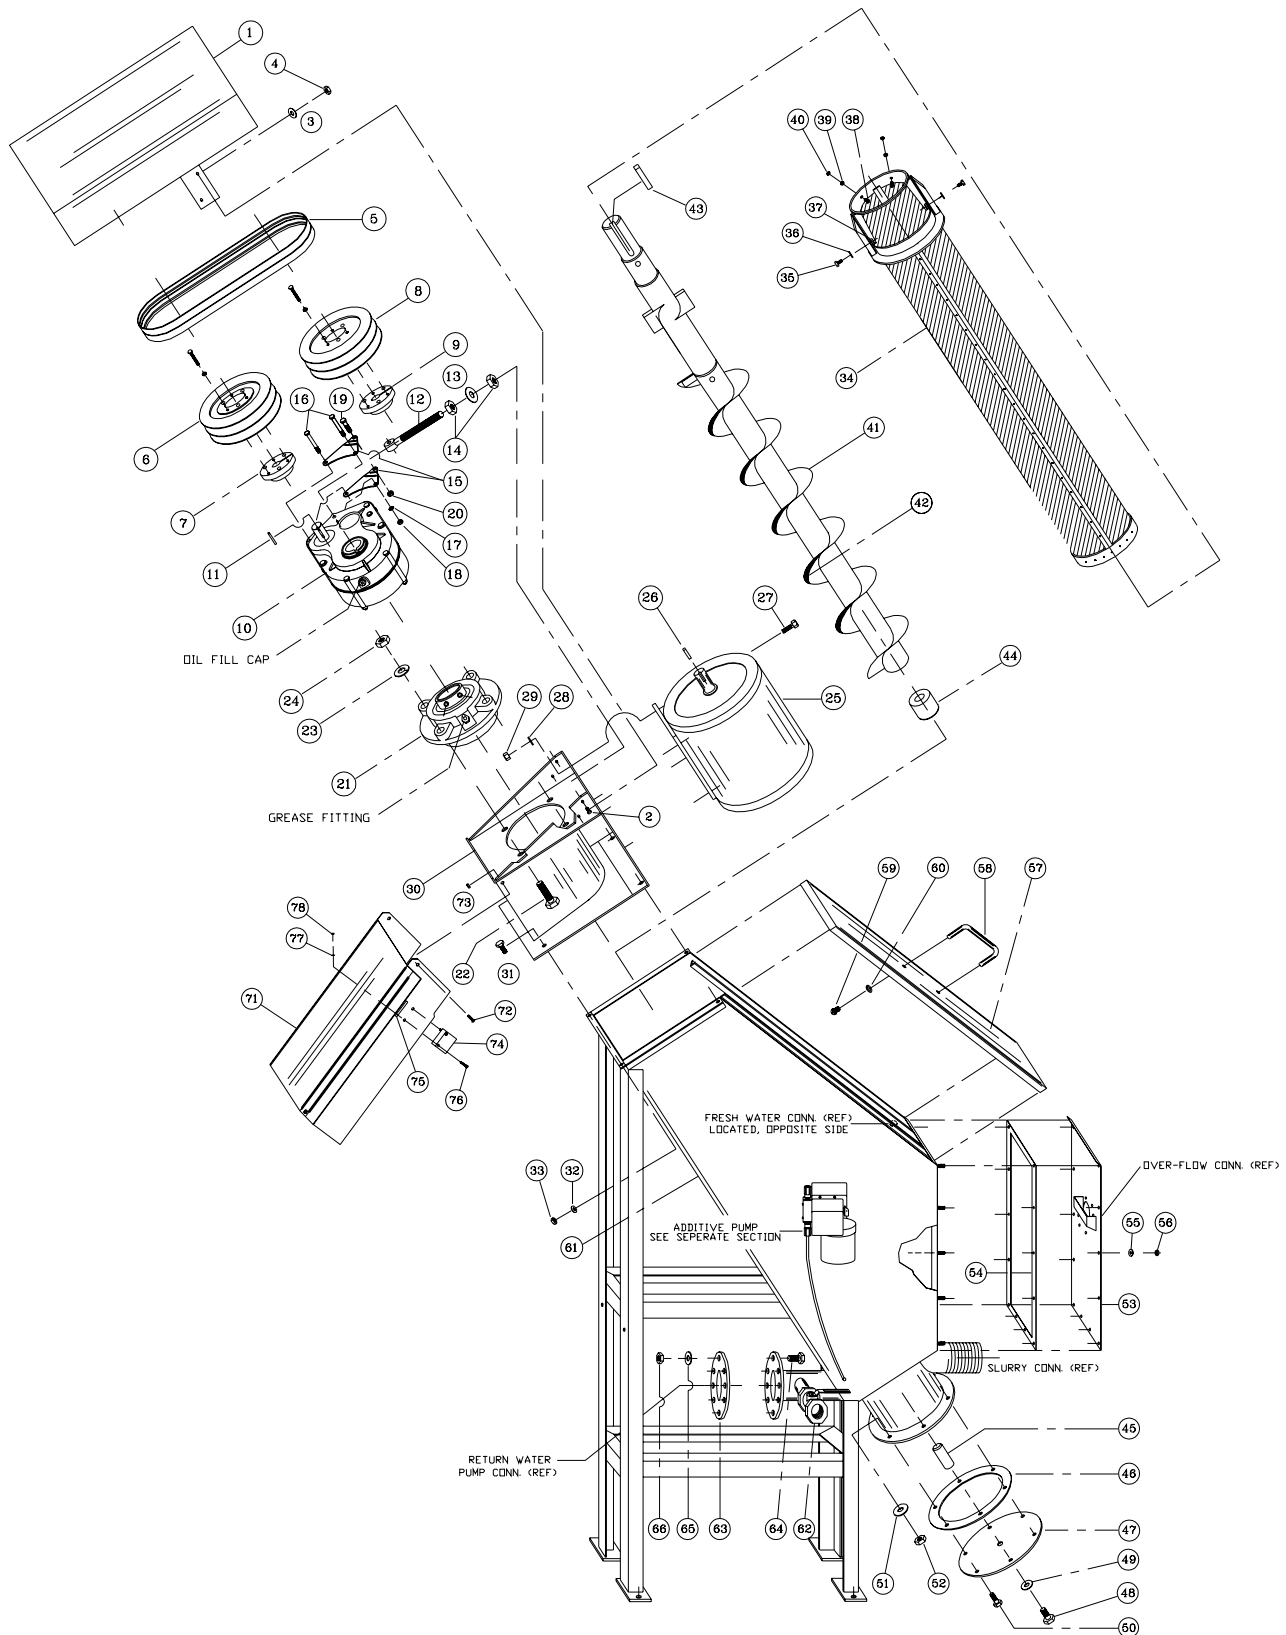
HYDRA-EXTRACTOR® MODEL HE-9S, EXPLODED VIEW
